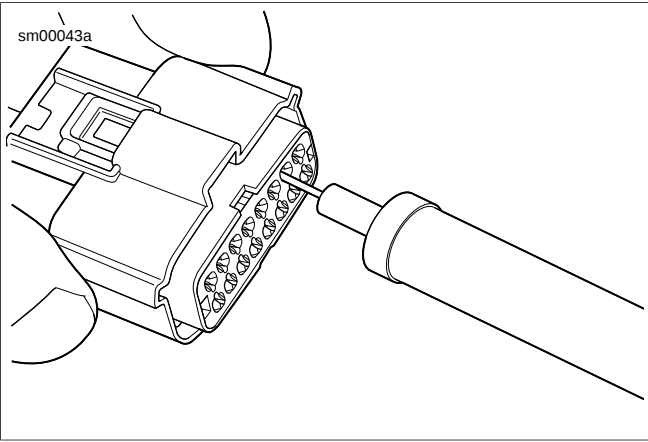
Molex MX 150 Sealed Connector: Terminal Remover (HD-48114)
